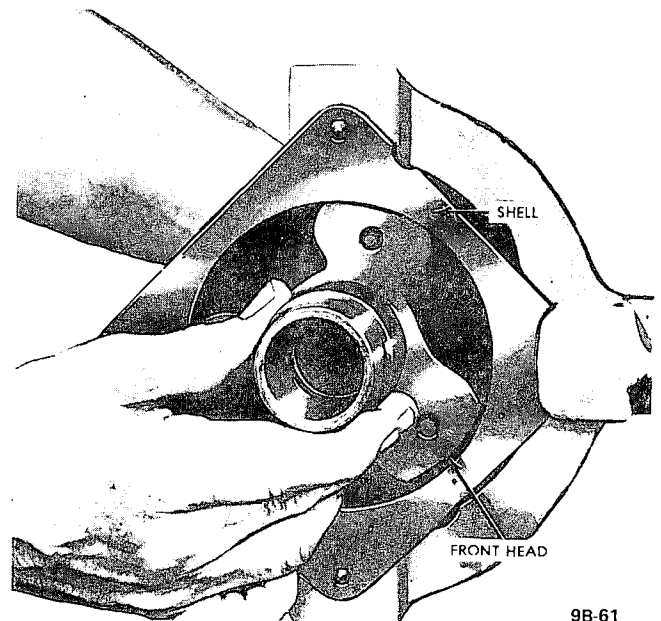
B-86 Removing Front Head - 6 Cylinder Compressor
